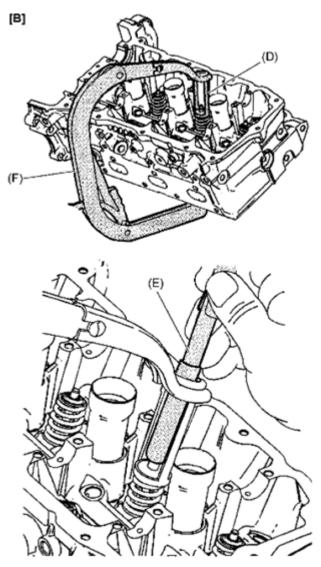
Compressing Valve Spring Courtesy of SUZUKI OF AMERICA CORP.
